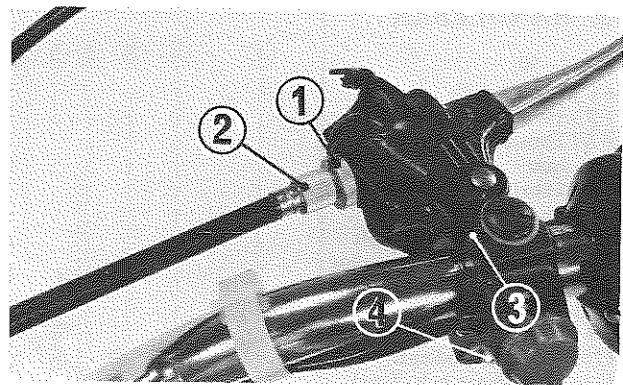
(1) Lock nut (2) Adjusting nut (3) Handlebar bracket (4) Screw
